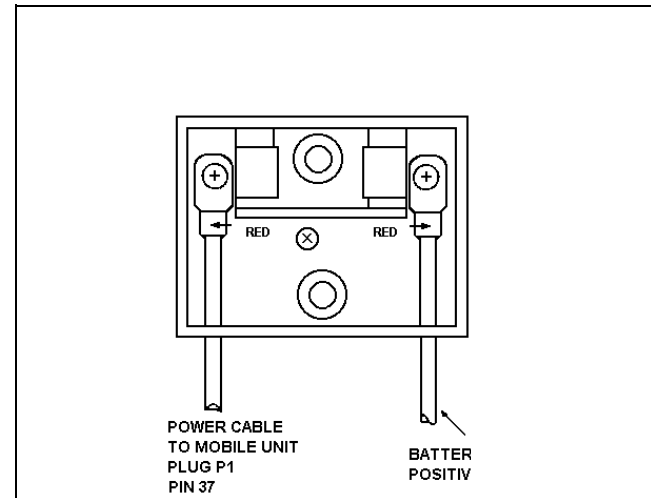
POWER CABLE/FUSE ASSEMBLY CONNECTIONS
